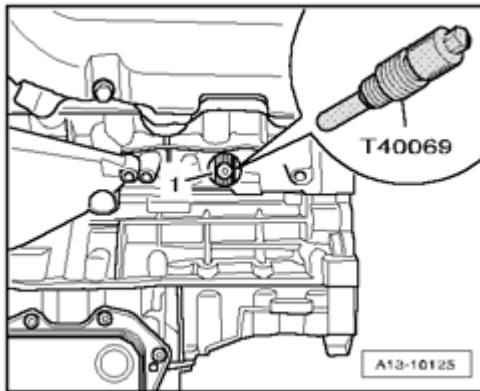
Installing Crankshaft Holder T40069 Into Hole
